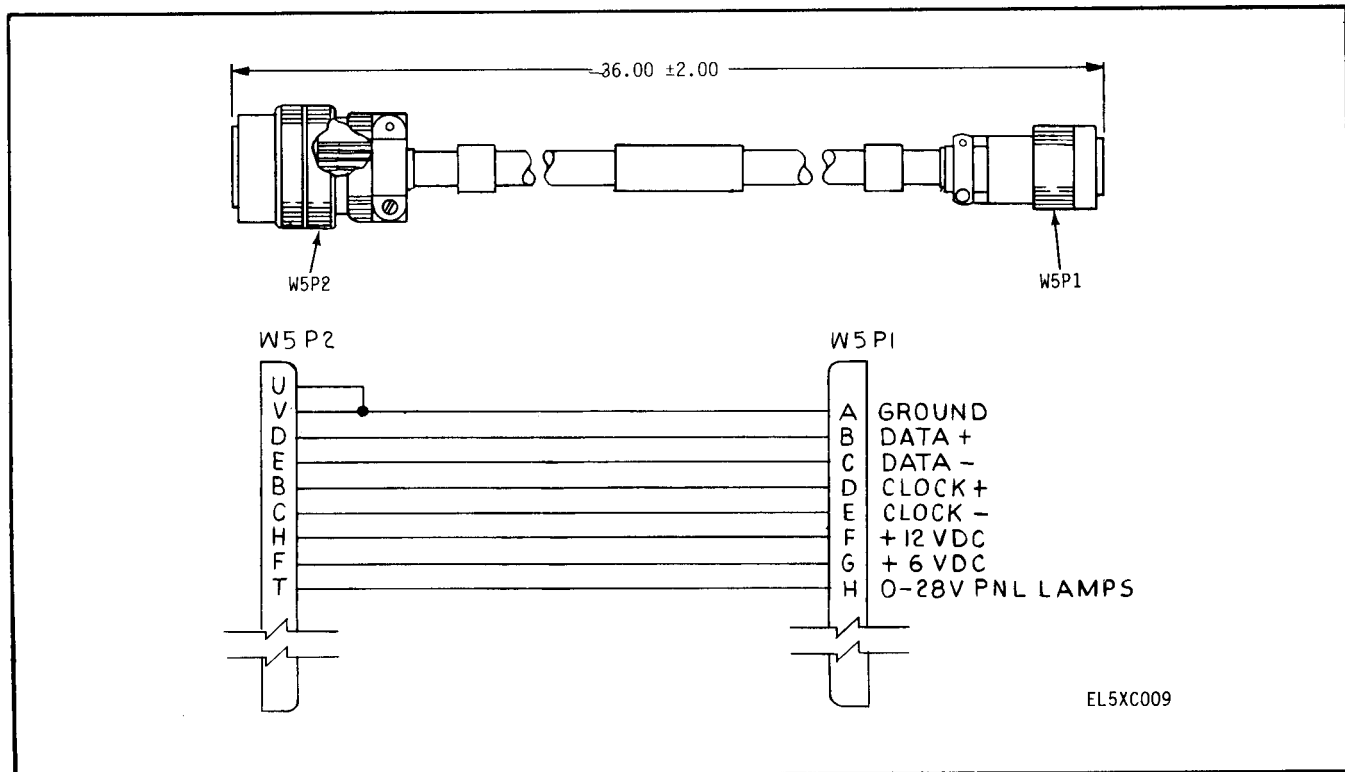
CX-13106/ARC-164(V) Cable Assembly Wiring Diagram
